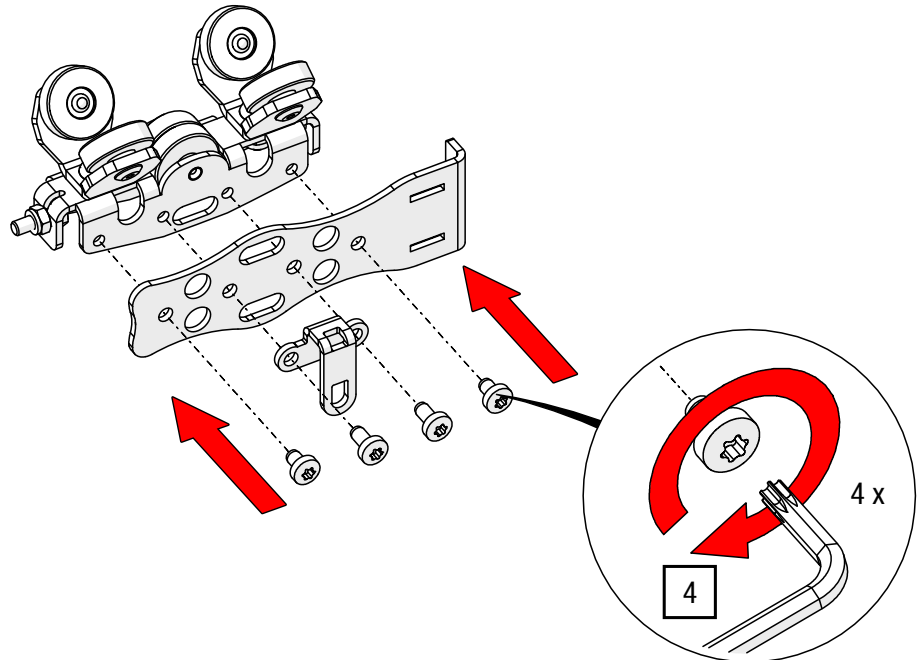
OFFICE master runner – Mount side plate, eyelet plate, and magnet bracket
